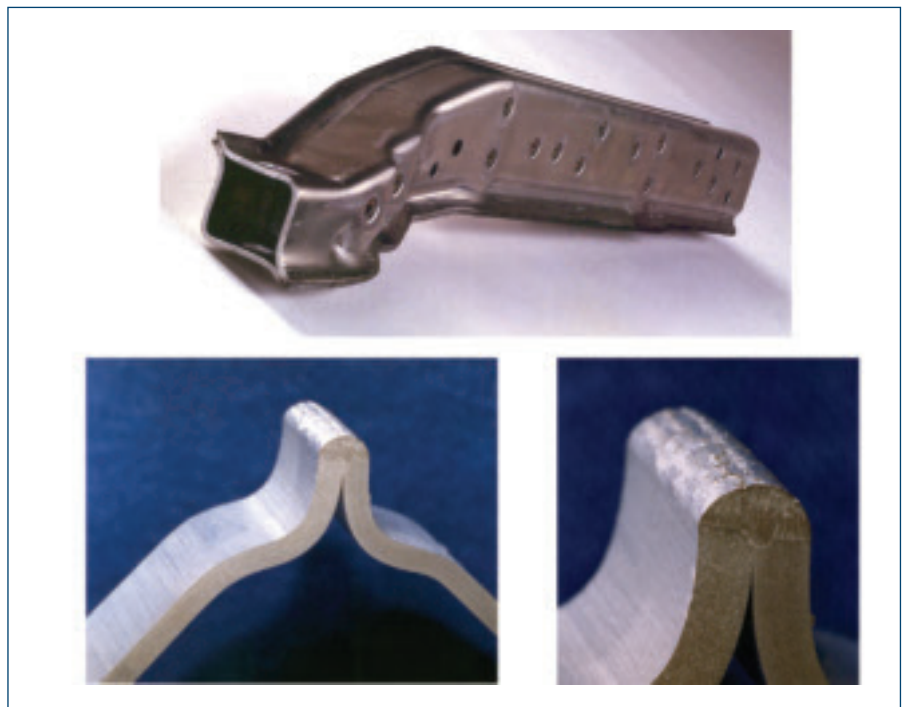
Nonvacuum EB-welded aluminum dashboard beam component.
